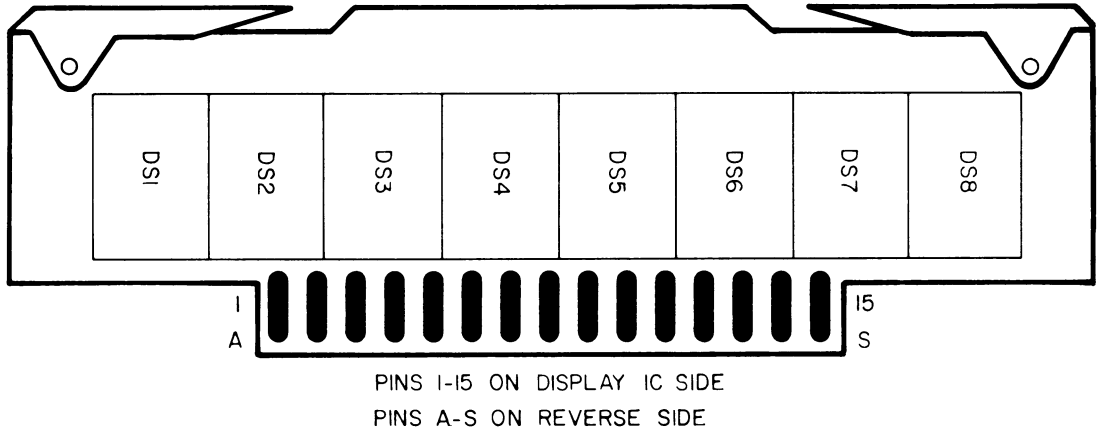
Counter Display Board Assembly A1A2 Parts Locations
